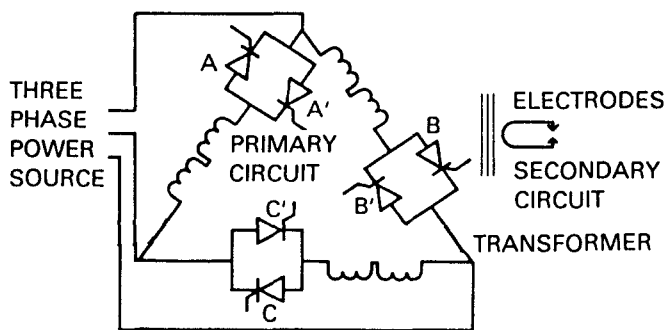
Three-Phase Welding Machine with SCR Contactors
